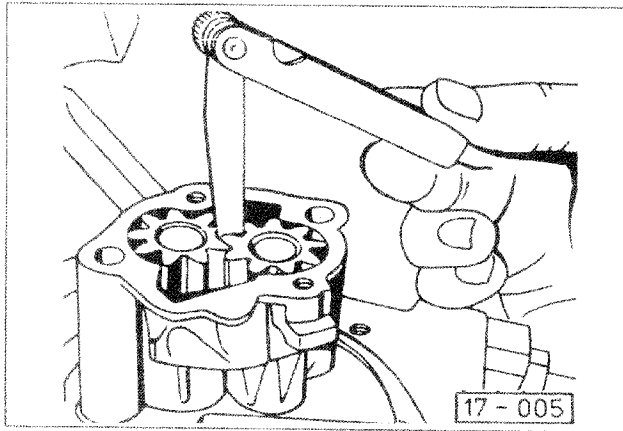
Oil pump gear backlash being measured using feeler gauge.
